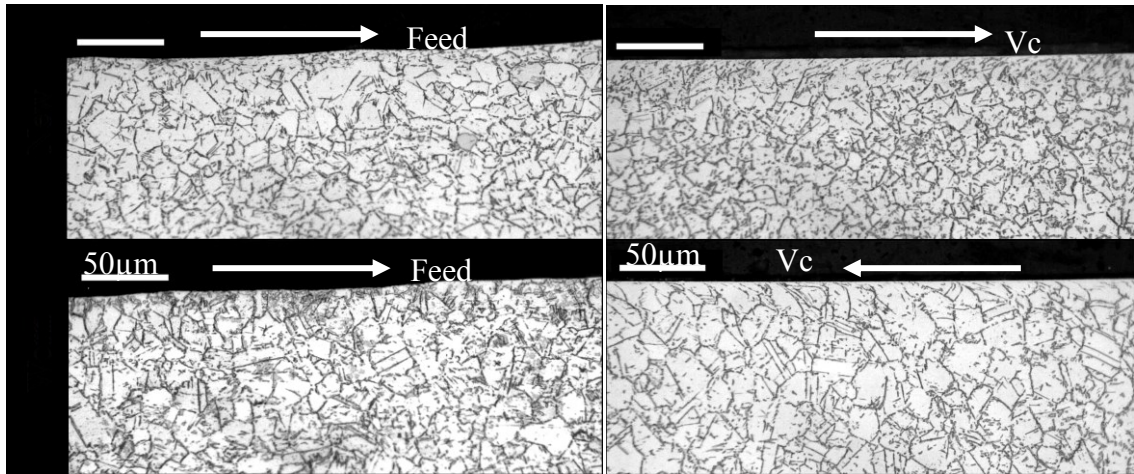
Cross sectional optical micrographs of machined workpiece sub-surface of Test 2 following turning with new and worn inserts
